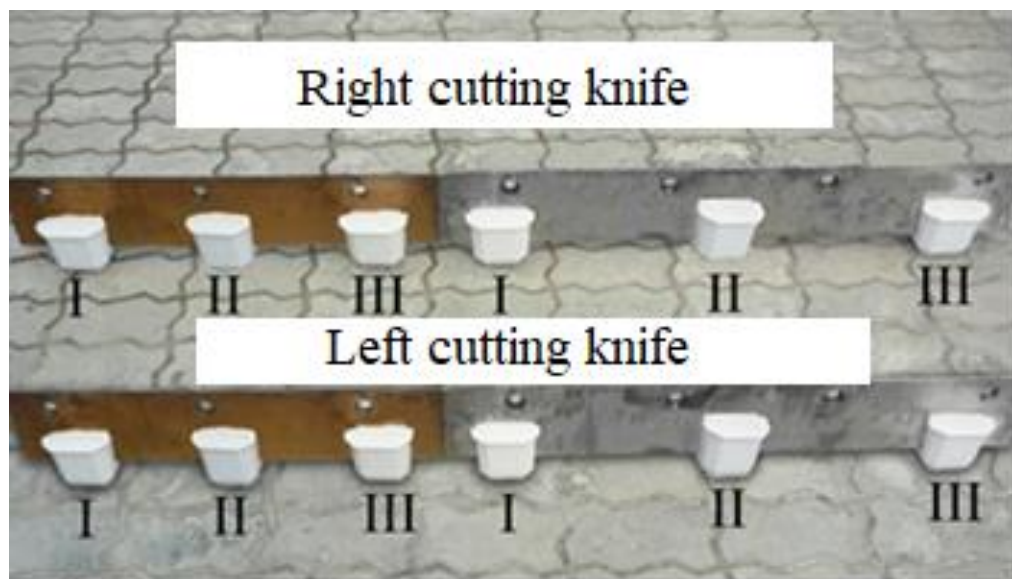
Plastic molds with medium cutting knives before testing on the motor grader DZ-180.
